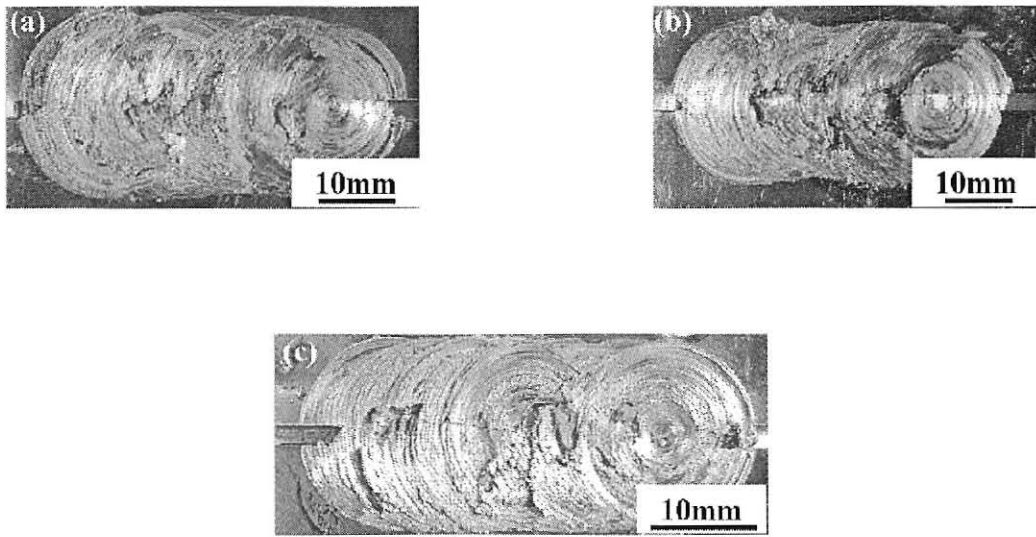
Appearance of the friction stir welded specimens: (a) 350rpm, 150mm/min, (b) 360rpm, 150mm/min, (c) 390rpm, 150mm/min.
